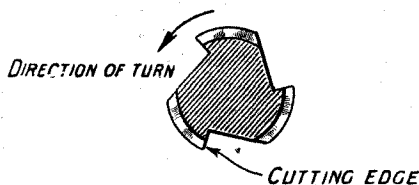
Careful setting of the angle of the cutting edges will ensure an efficient tool.
